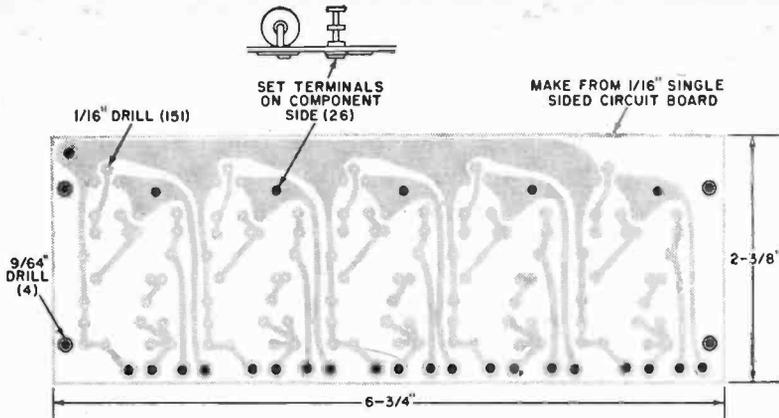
Printed circuit board showing overall dimensions and drill sizes for all holes required.
